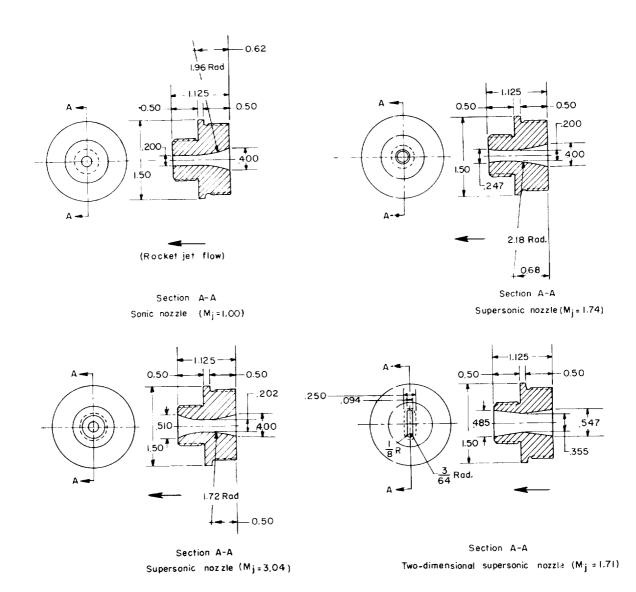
Nozzle geometries and parameters used in the investigation.  $\gamma$  = 1.25 for rocket gases. (All dimensions are in inches.)
